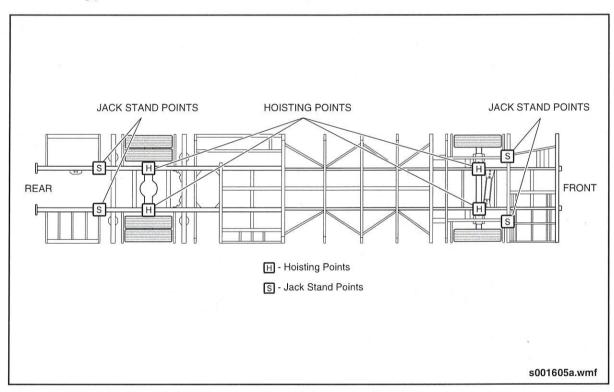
Jacking (hoisting) Points & Stand Placement
